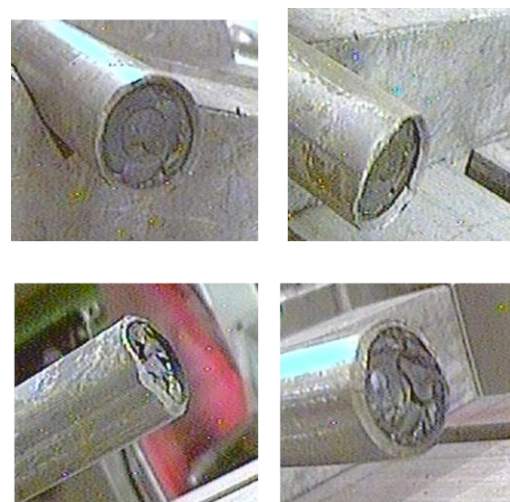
Several views of the SNF rod at the breakage after bending test.
